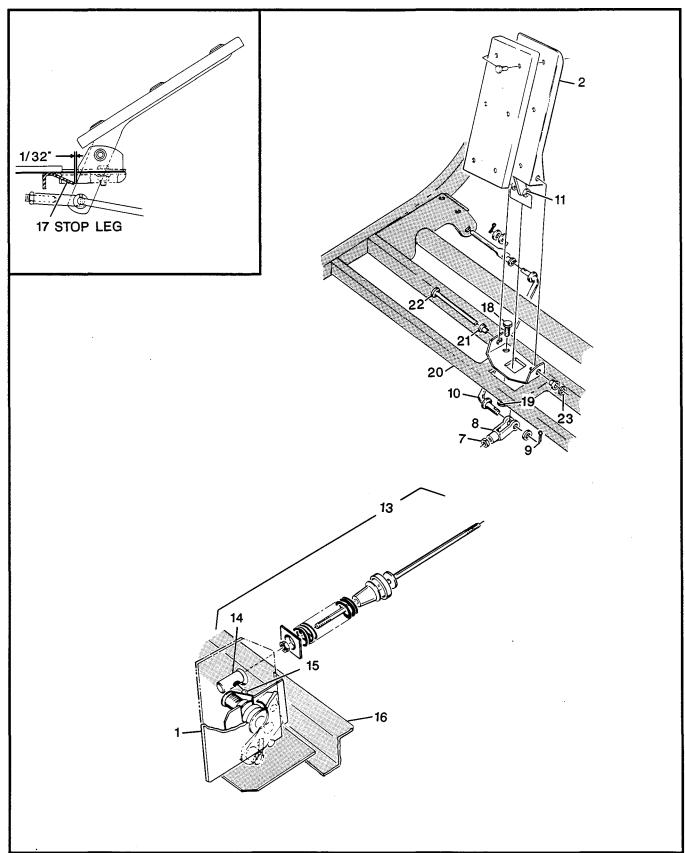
ACCELERATOR LINKAGE AND PEDAL REMOVAL
